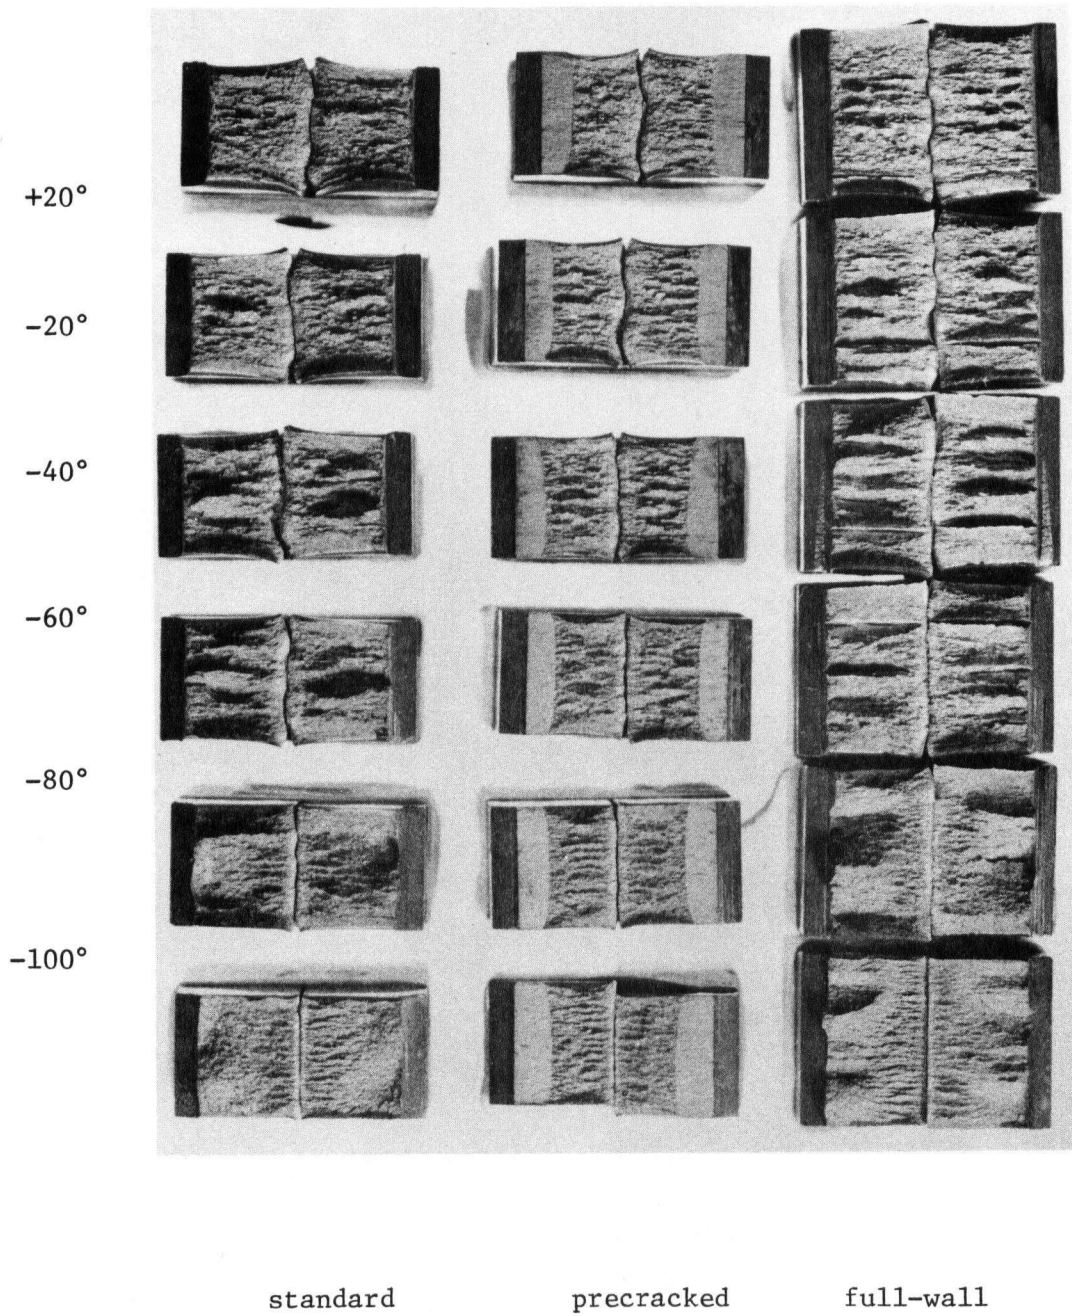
AF-2 steel fracture surfaces, crack parallel to rolling direction.
